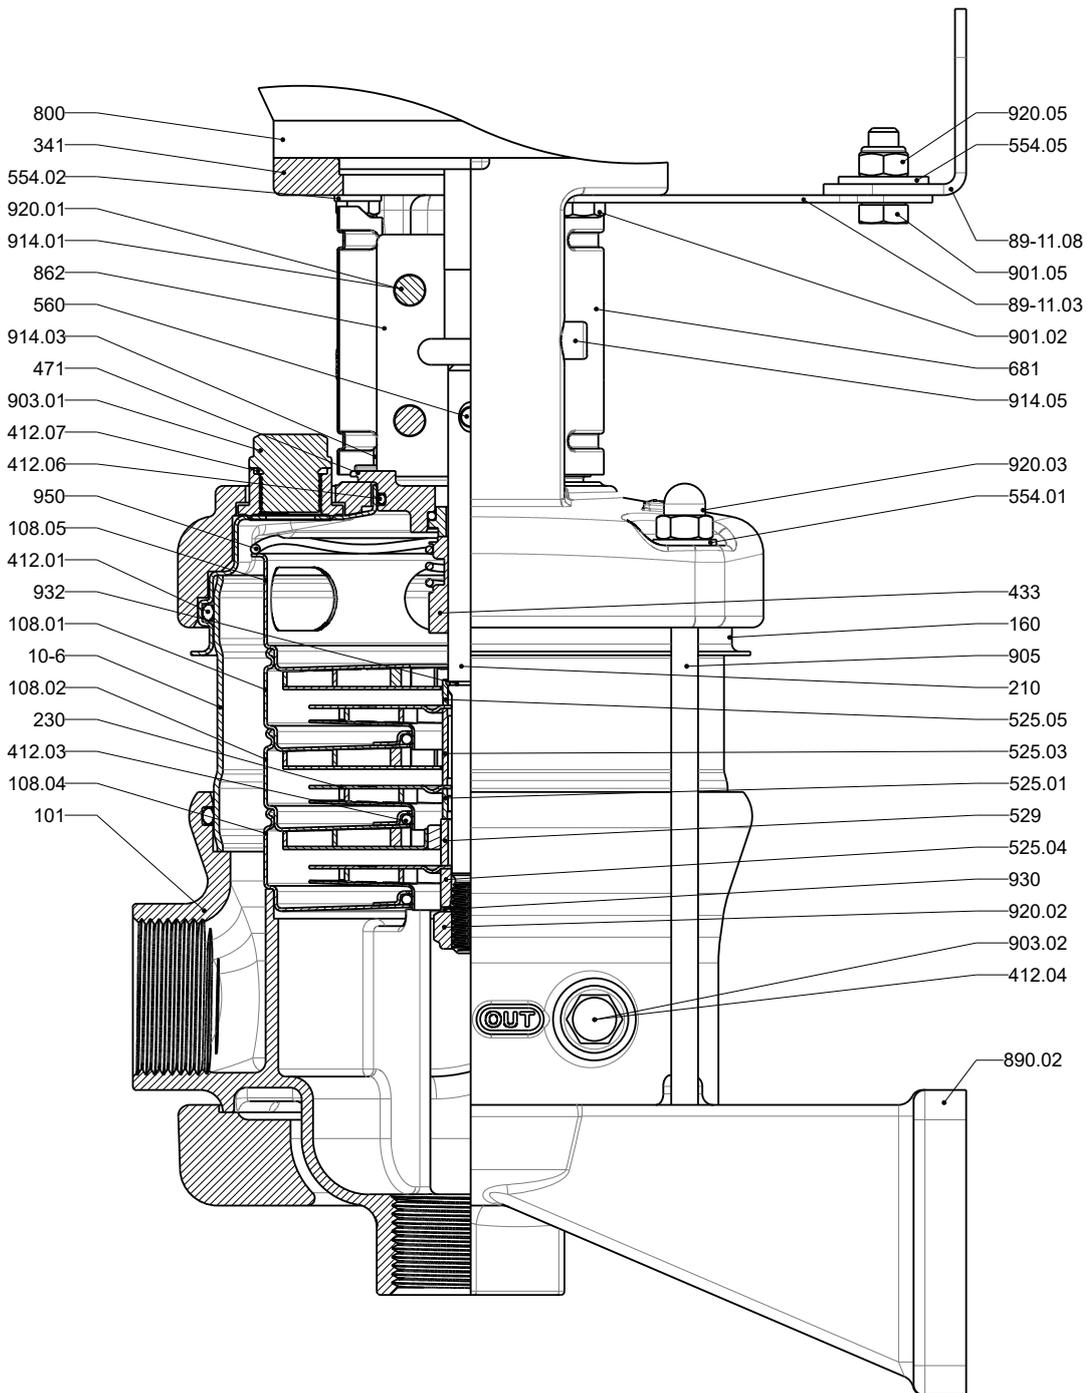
General assembly drawing of DPH(S)I 2/4/6B
